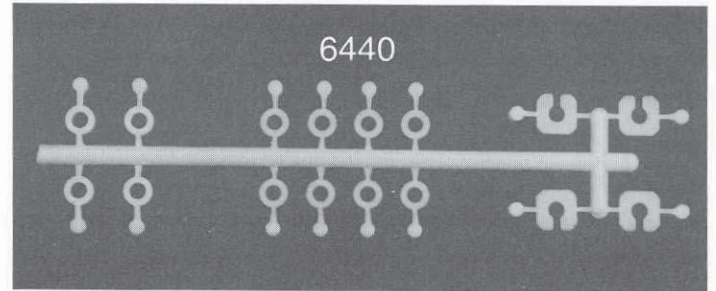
& 93 1) Go back to the shock seal bag and remove the #6440 shock seal parts tree and the eight #5407 red O-rings. The molded parts tree contains only enough parts to assemble four shocks. Be careful not to damage or lose any.
